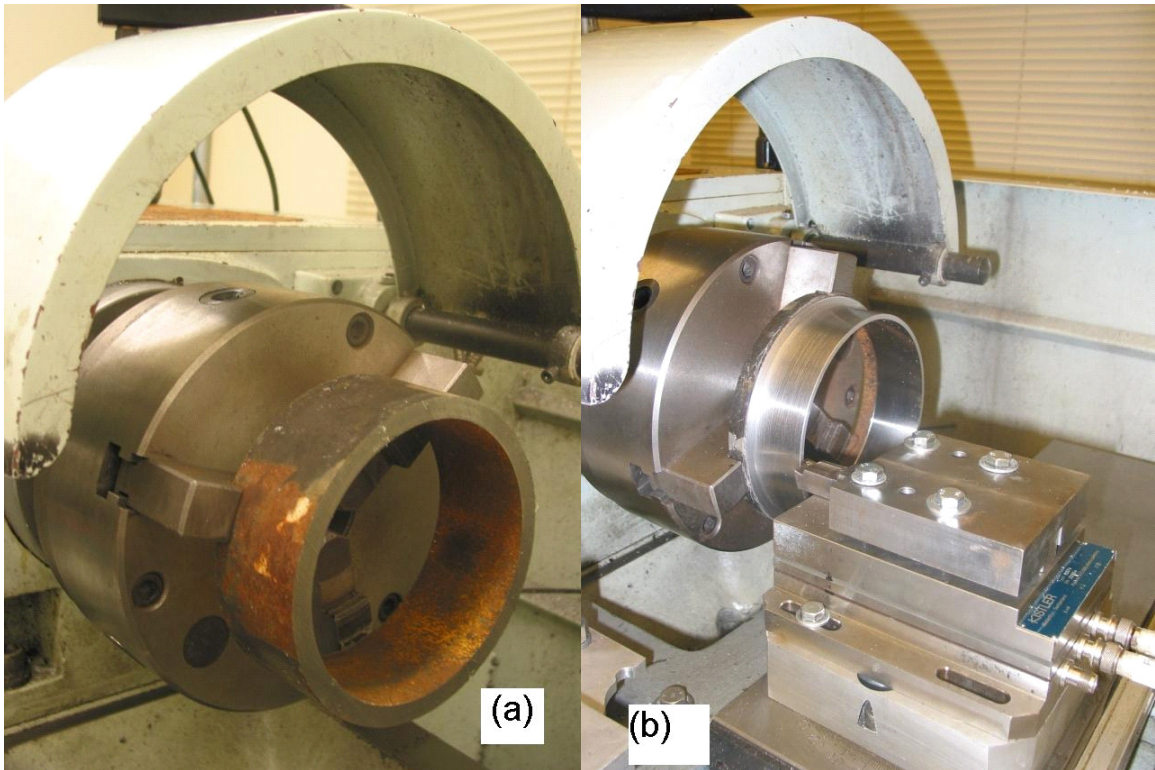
(a) Workpiece mounted on the lathe using a three jaw chuck,
